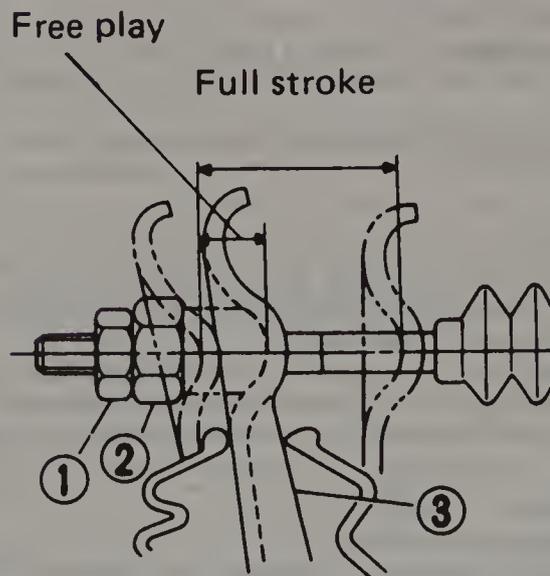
Clutch cable adjusting nut location (Sec 43)
